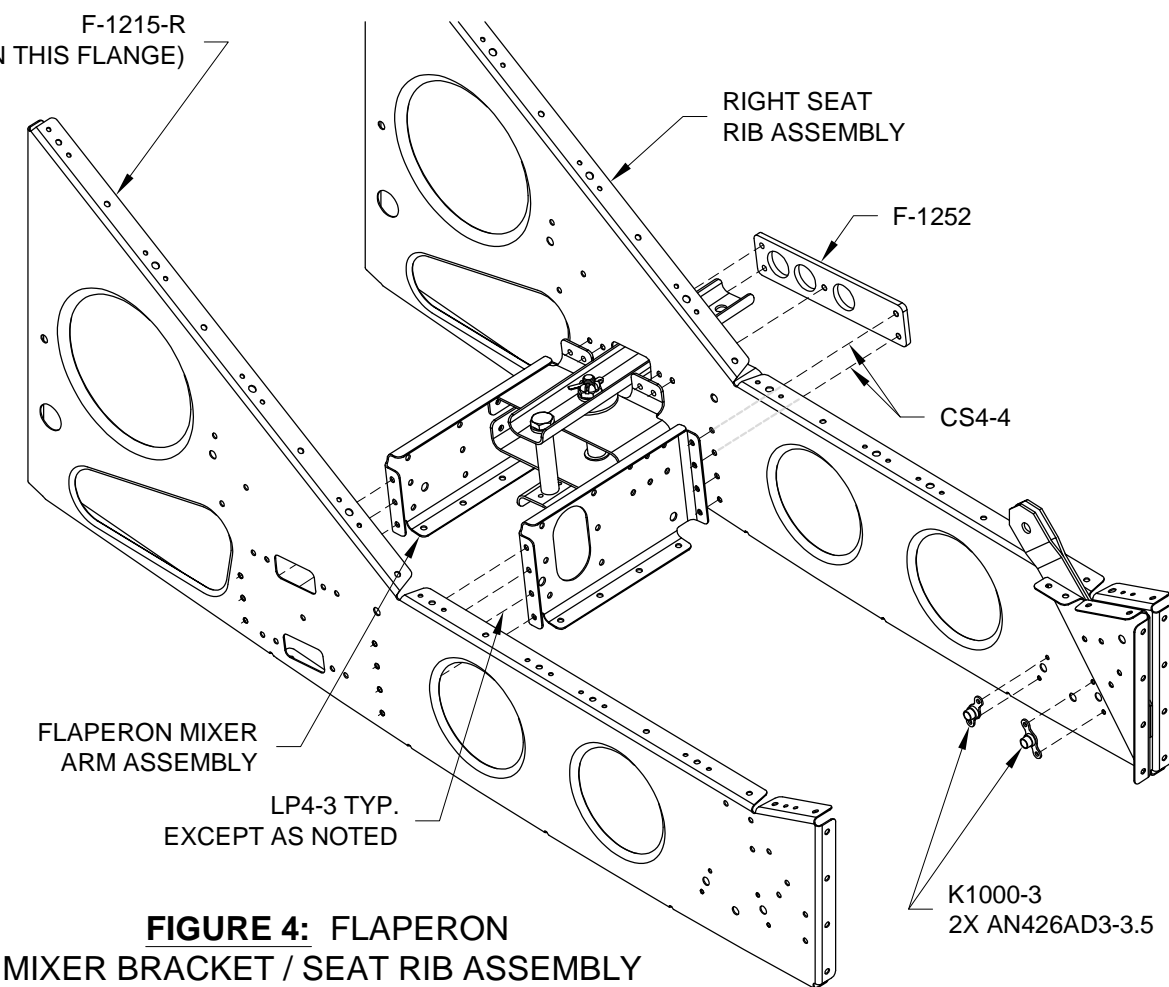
FLAPERON MIXER BRACKET / SEAT RIB ASSEMBLY
